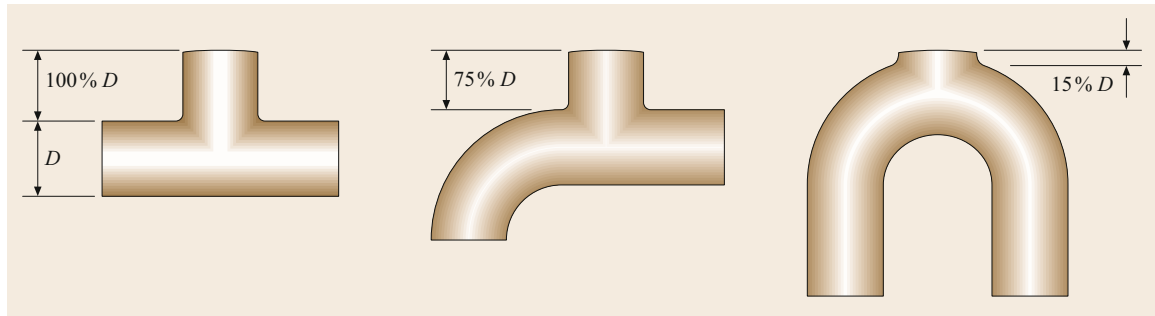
Product geometries producible by tube hydroforming (after [11.32])
